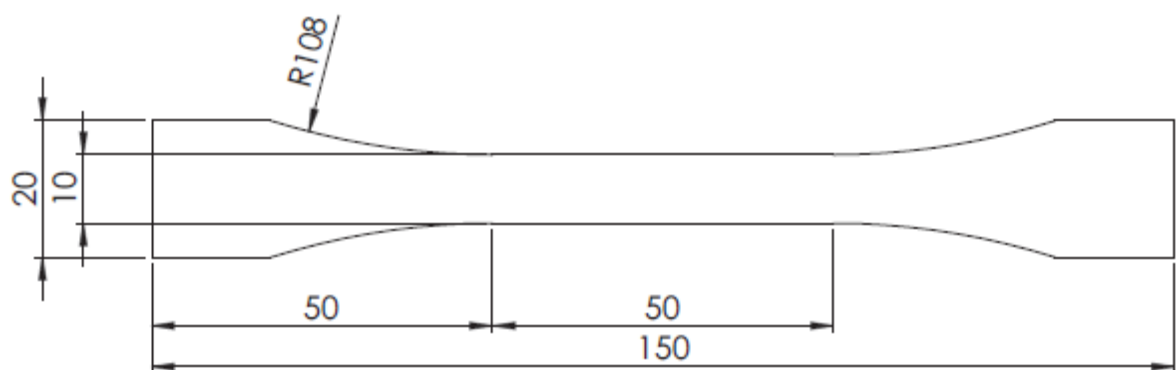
Geometry of the bulk specimens (ASTM D-638 with dimensions in mm) [22].
